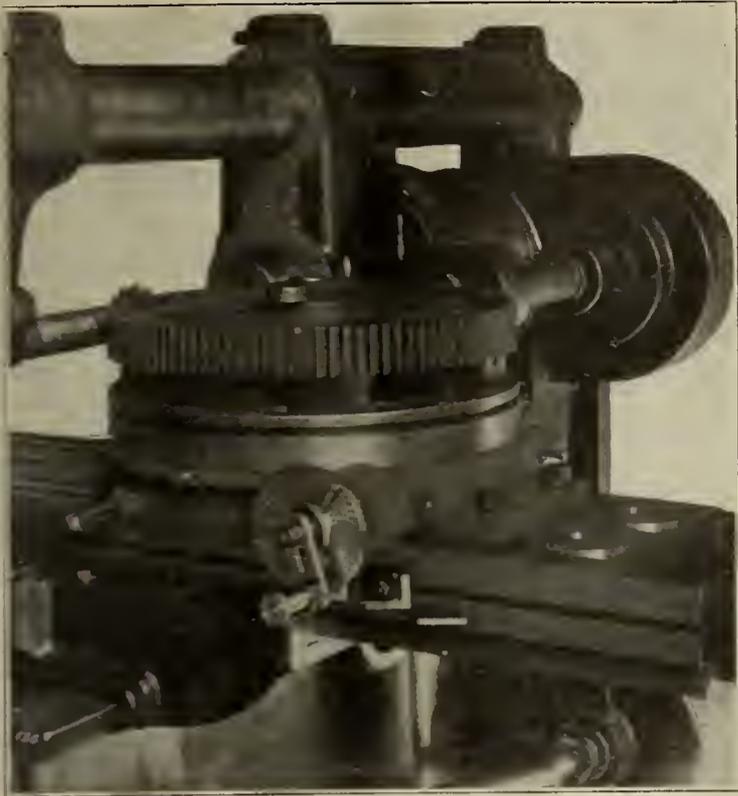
CUTTING A GEAR, 6-PITCH, 18-IN. DIAMETER.
